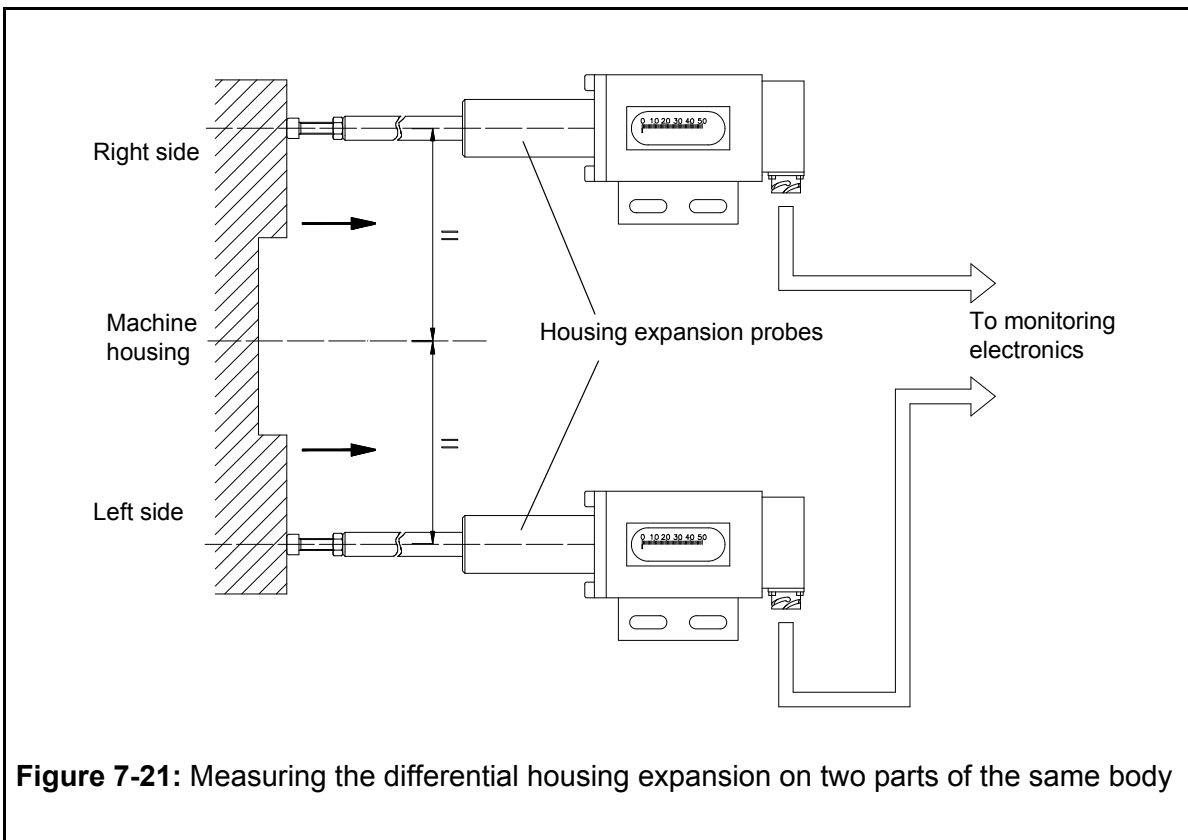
Measuring the differential housing expansion on two parts of the same body
